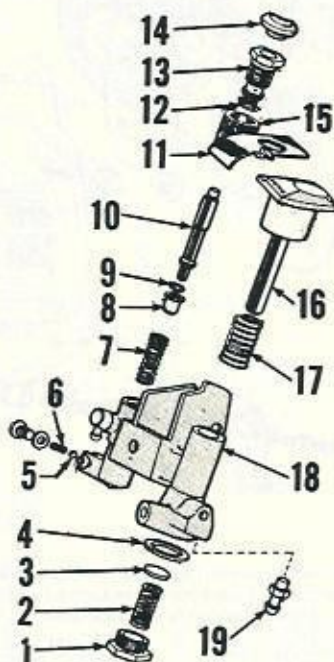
Exploded view of model 177 manual oil pump and fuel primer assembly. Refer to Fig. SK26 for a view of the manual oil pump typical of those used on other models.
